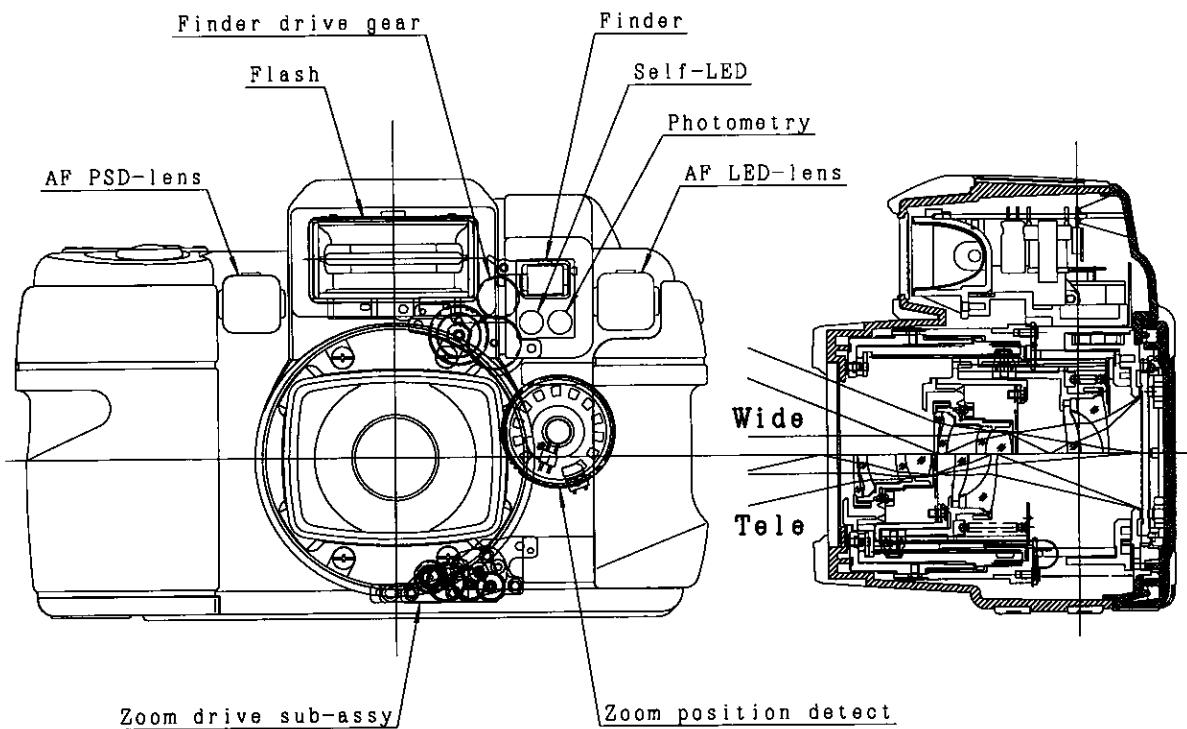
Front view and sectional view of GENBAKANTOKU ZOOM
